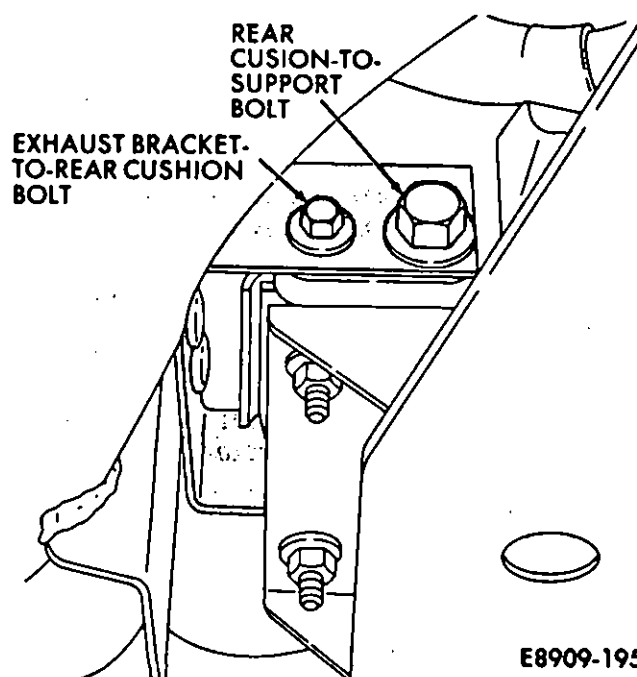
Attach Exhaust Bracket to Rear Cushion
